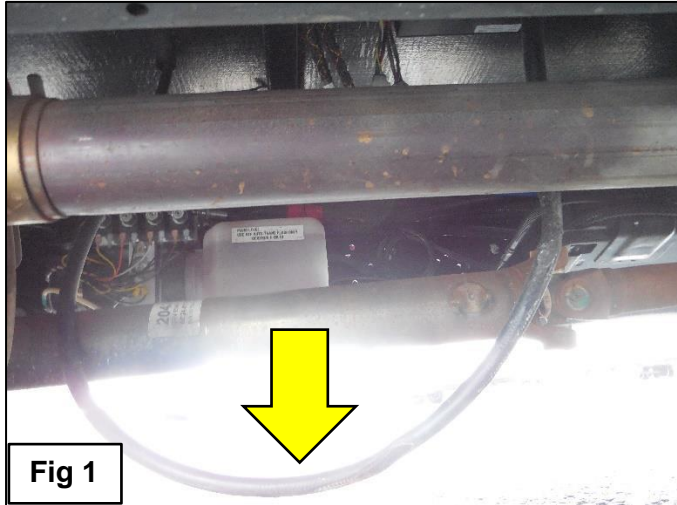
LP hose hanging down - insufficient clearance from the driveshaft, and/or the exhaust.
